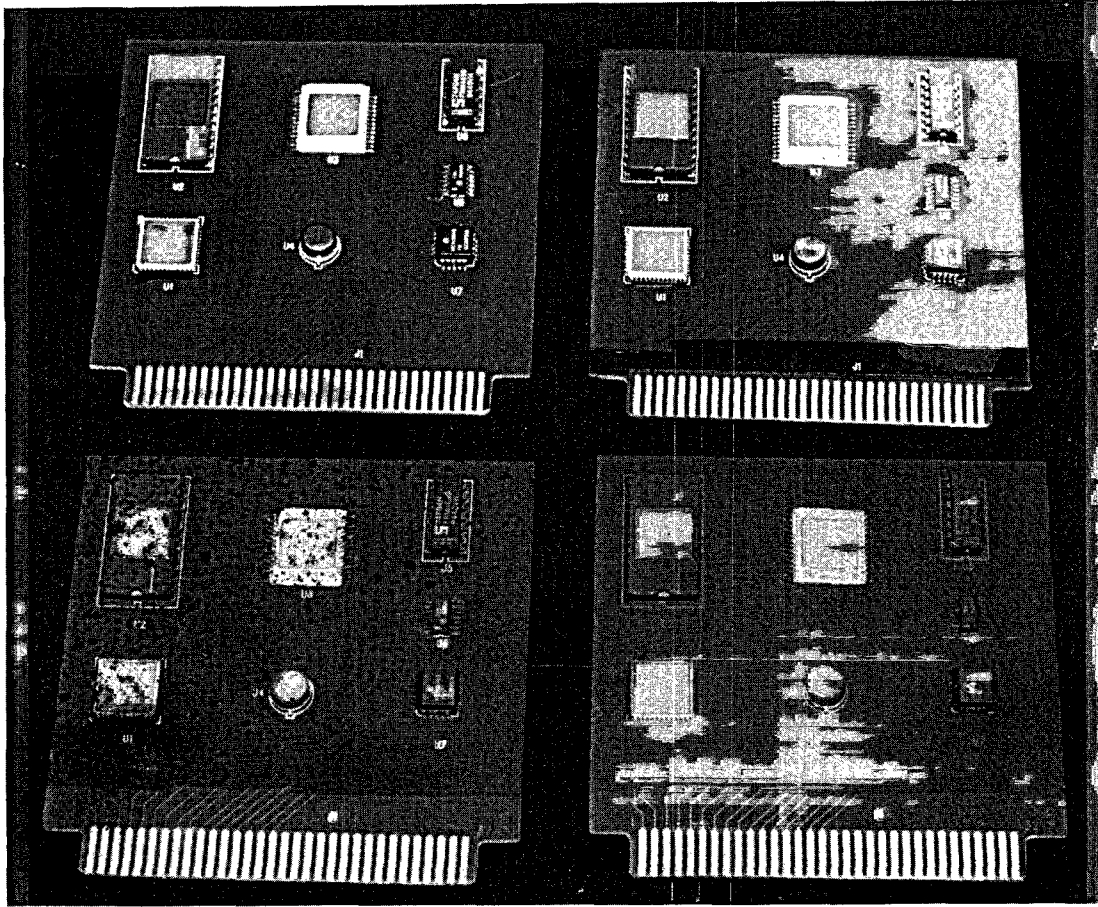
Exposed chip-mounting boards from different tests. Upper left: control. Upper right: test 16. Lower left: in PC chassis for test 25. Lower right: in PC chassis for test 17.
